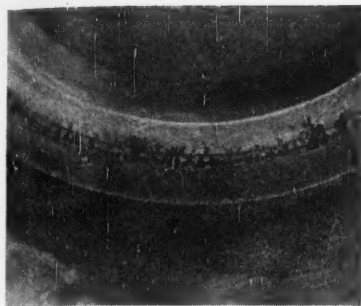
Corroded face of Type 316 stainless steel relief valve seat on a modern pipe still fractionation tower.
